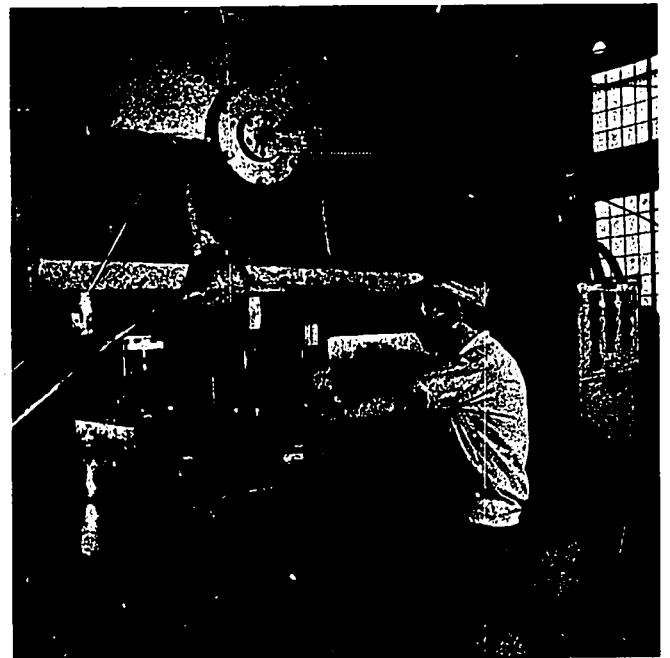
A skilled worker aligns the dies of a punch press. It is his job to keep this press in perfect shape for continuous shearing processes.
